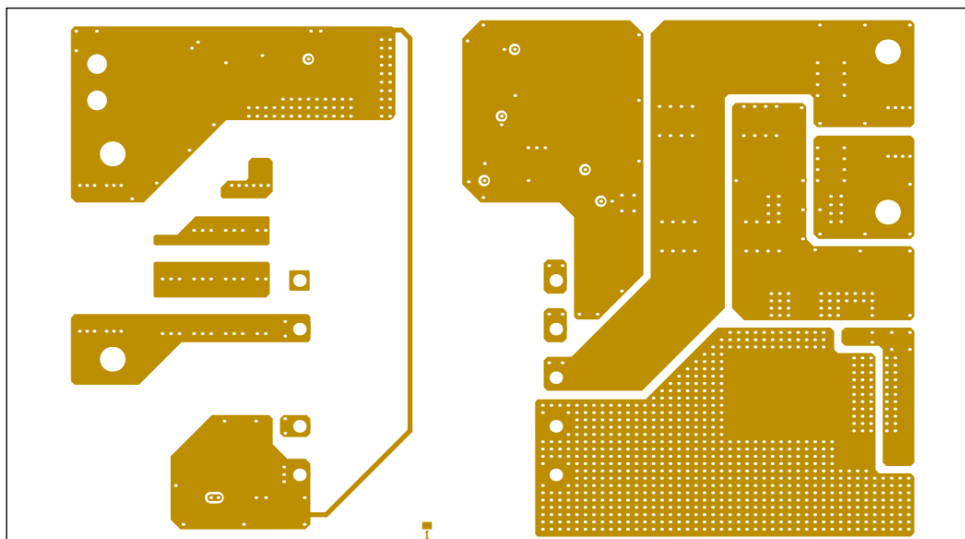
RDR-1074Q Mid-Layer 1 PCB Layout.
